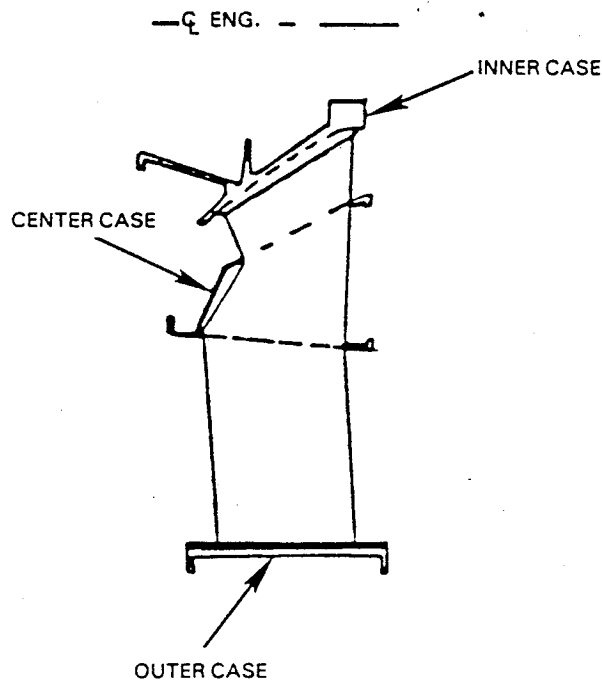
Casing Ring Configuration for the Intermediate Case Assembly
